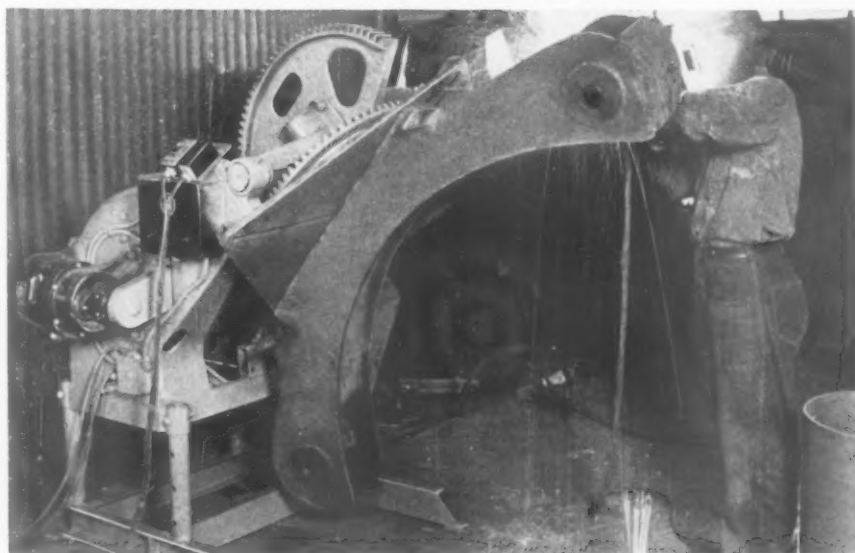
, below, is proof that welding positioners can take it. This is a Ransome design.
